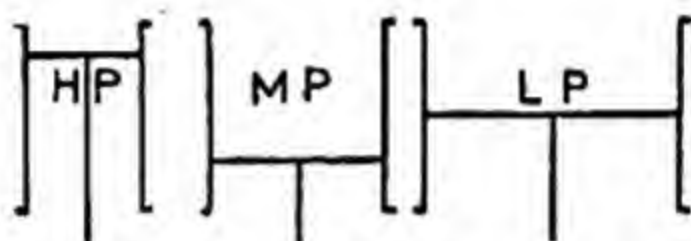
Cylinder arrangement of a three crank triple expansion engine.
